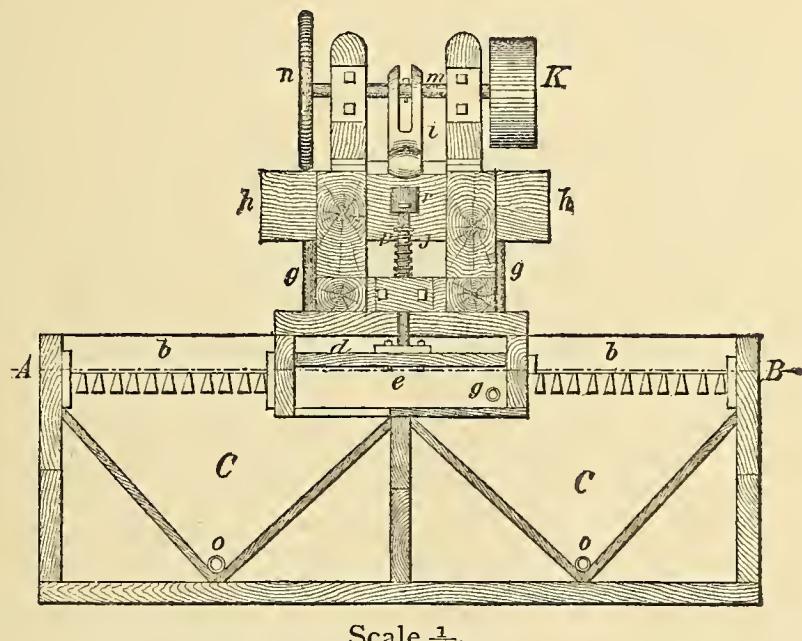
COLLOM'S JIGGER. Longitudinal Section.
